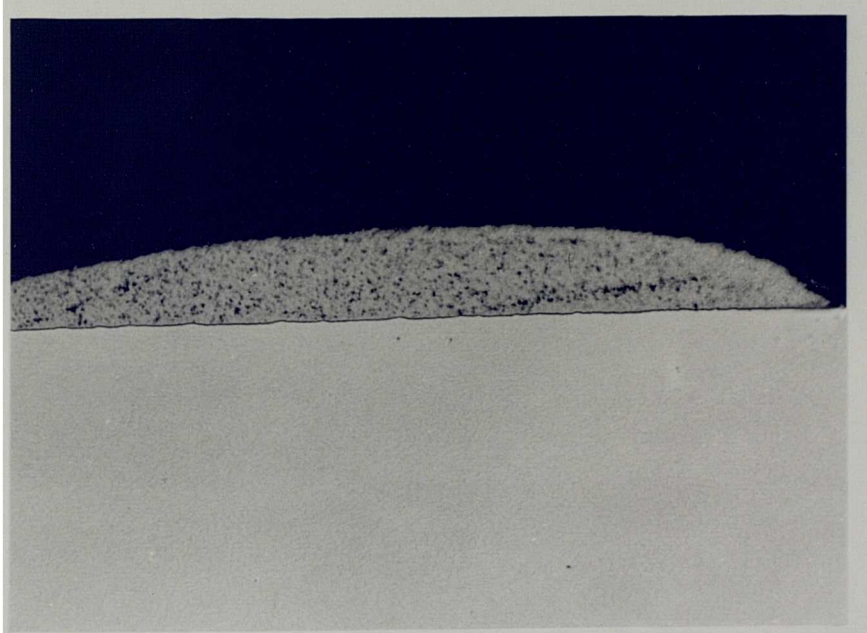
Crater formed in coated carbide (KC910) tool after separation of welded junction.
